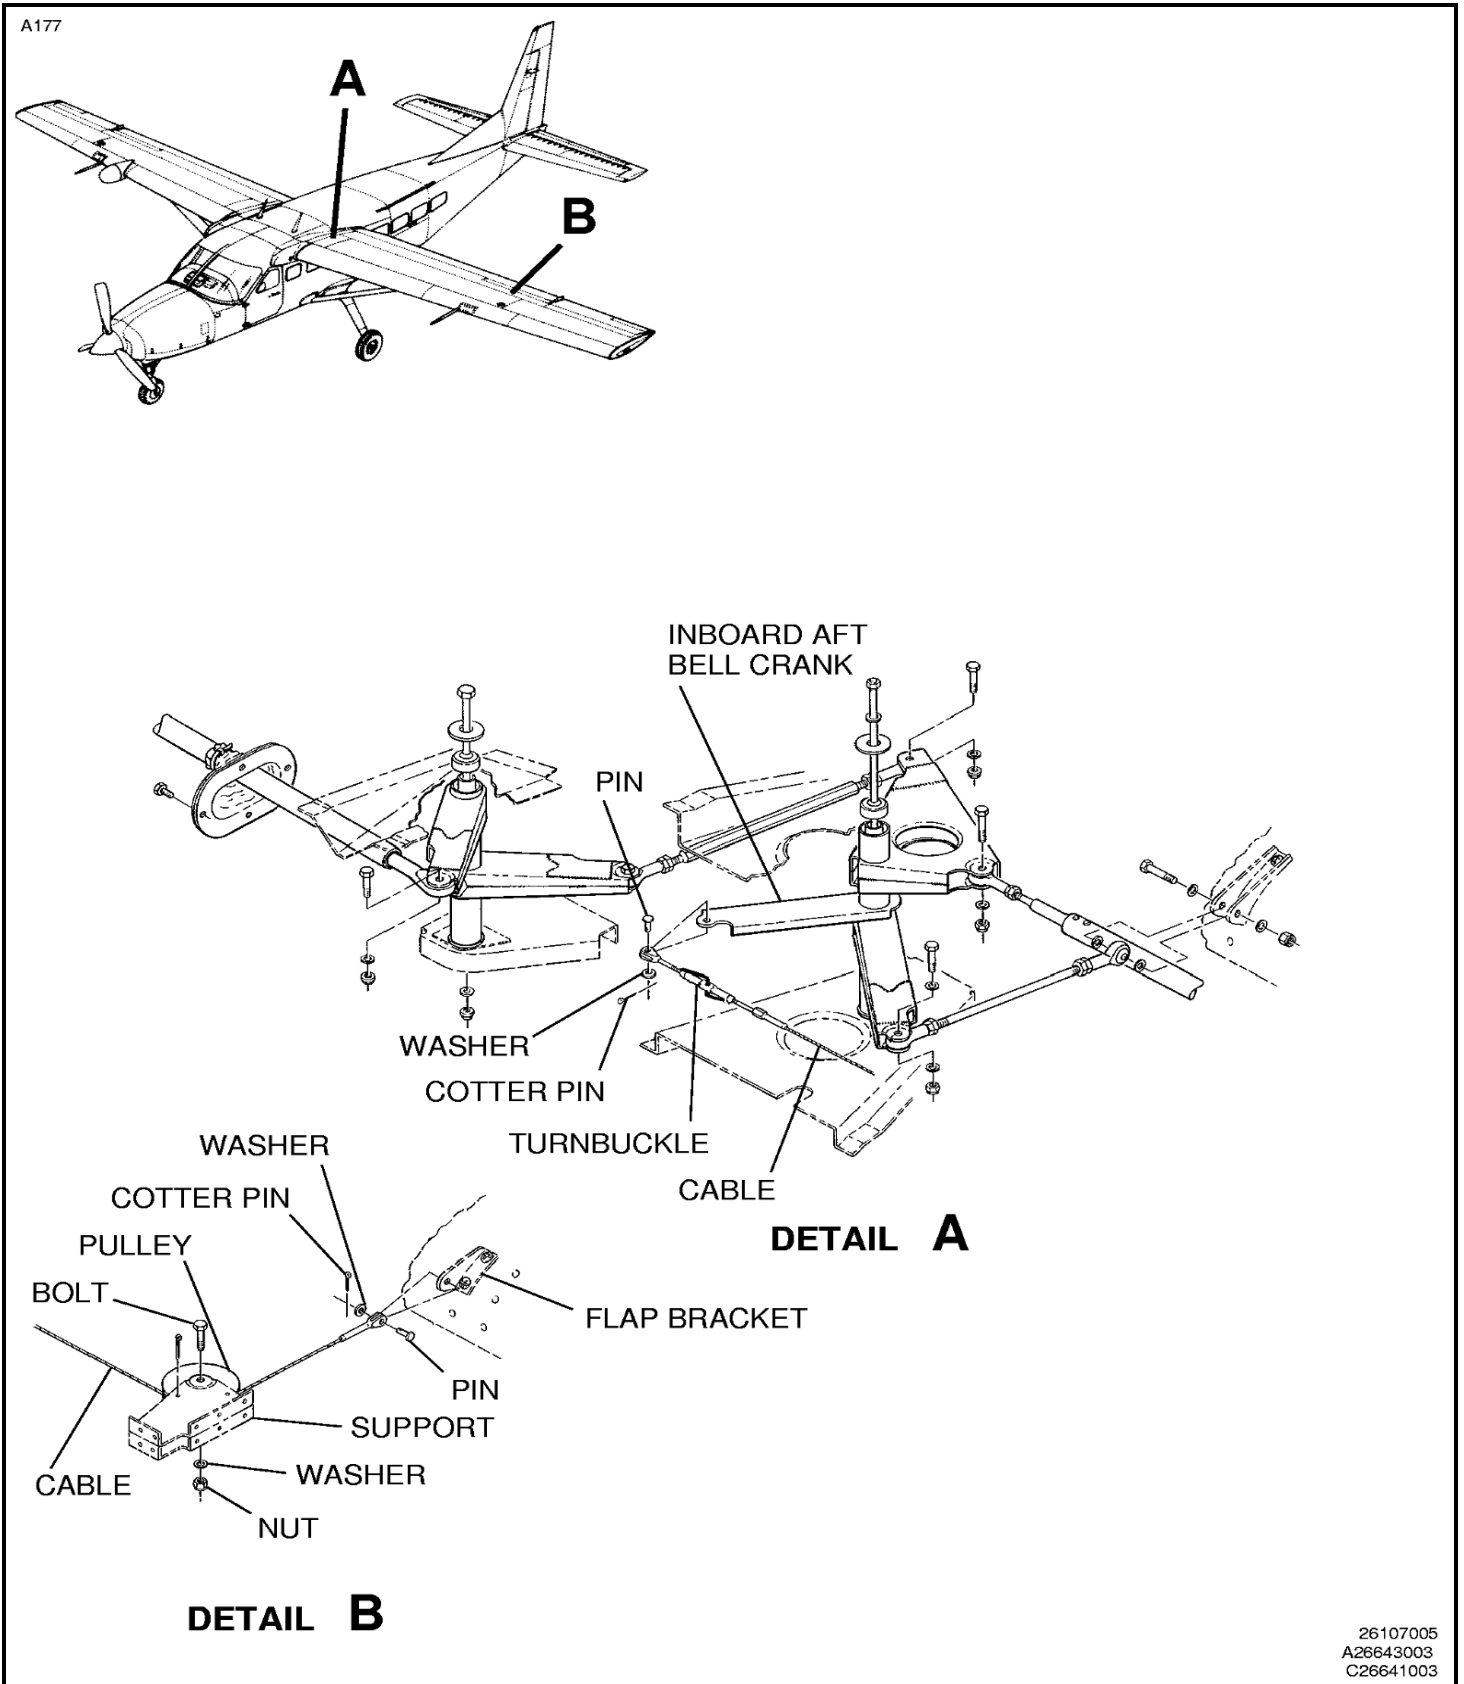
Sheet 1 : Flap Inboard Forward Bell Cranks
